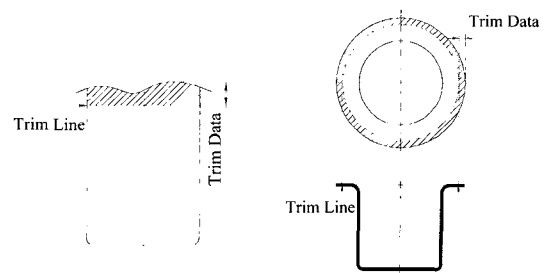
Trimming allowance for circular cup deep drawing without flange and with flange
